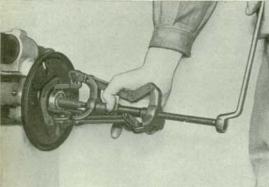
Remove swing arm assembly. Caution: When pressing a new
